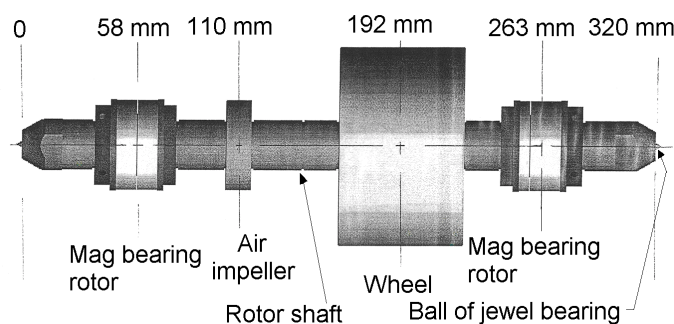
Schematic of rotor that shows the location of components. The total mass of the rotor is 2.26 kg. The diameter of the wheel is 102 mm.
